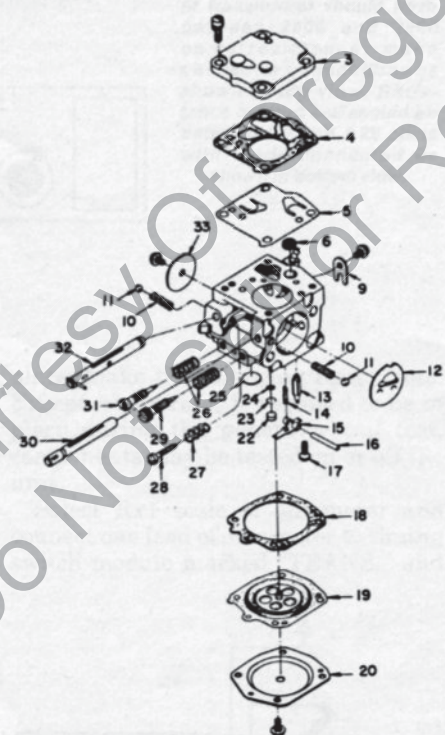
Exploded view of Tillotson carburetor used on model 250 and 270.
